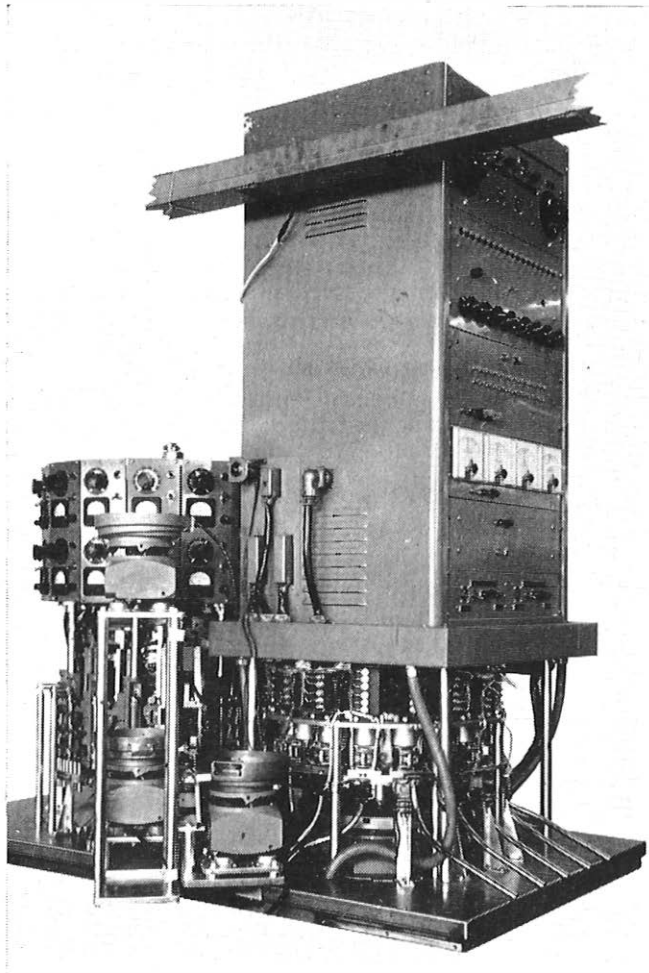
AUTOMATIC MACHINE FOR PRODUCING REED CONTACT UNITS
